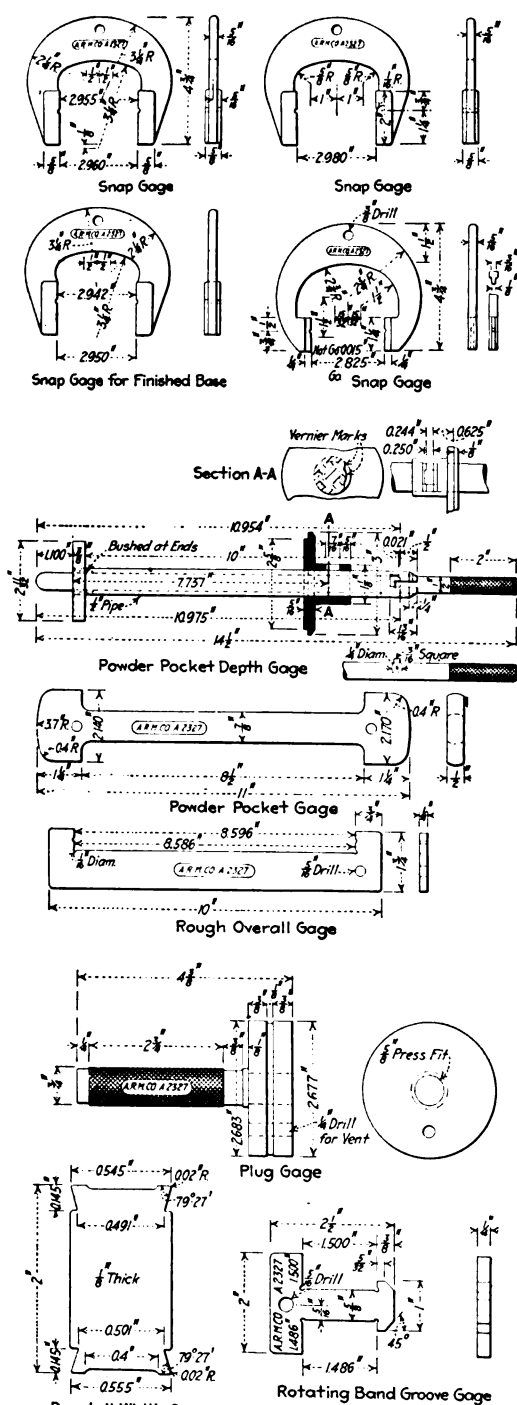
DETAILS OF A FEW OF THE GAGES, SHOWING TYPES USED
